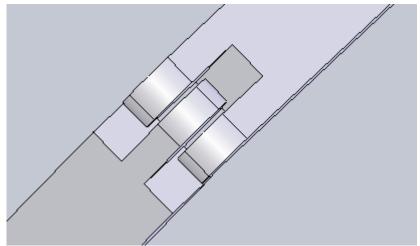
Shows the dimensional inaccuracy which produces backlash in the linkage joints.
